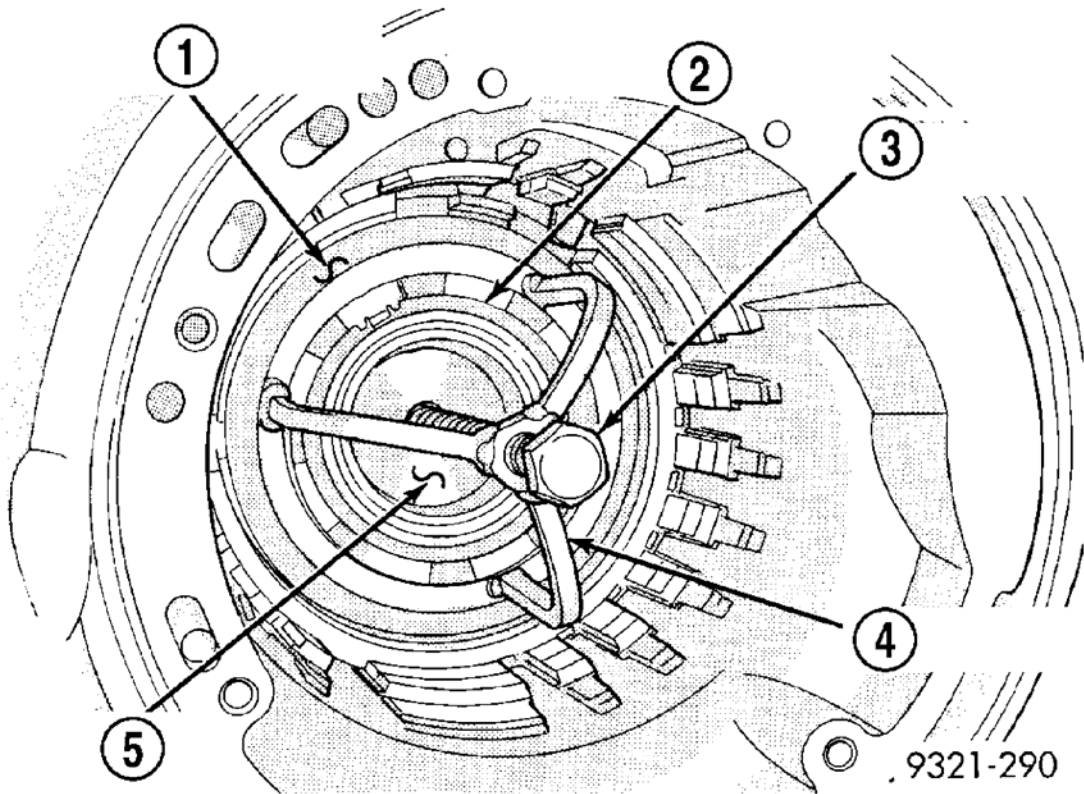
Installing And Loading Low/Reverse Spring With Compressor Tool 5058A-3, 5059A And Disc 6057 To Facilitate Snap Ring Installation
